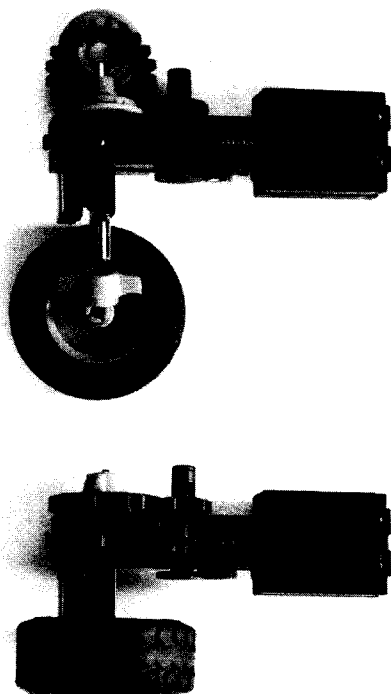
Assembly of the motor, transfer box and wheel gear.
